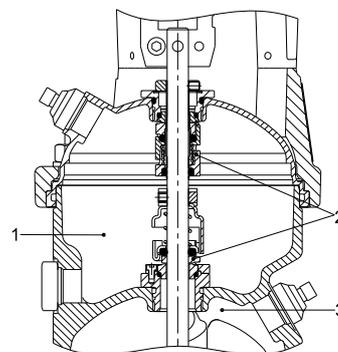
CR 1s to 5 with back-to-back seal arrangement
